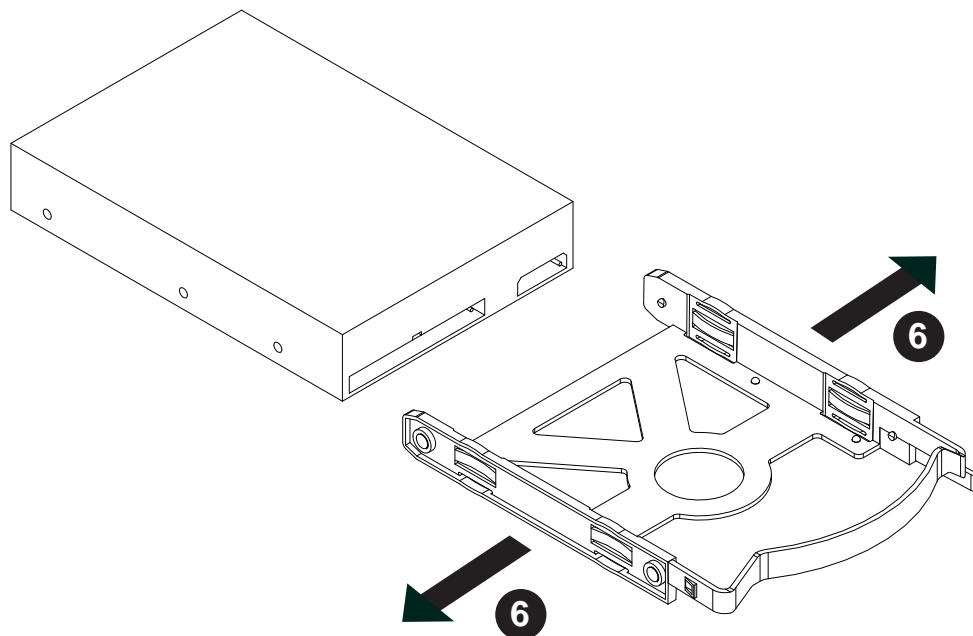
Removing a 3.5" Hard Drive from a Hard Drive Carrier
